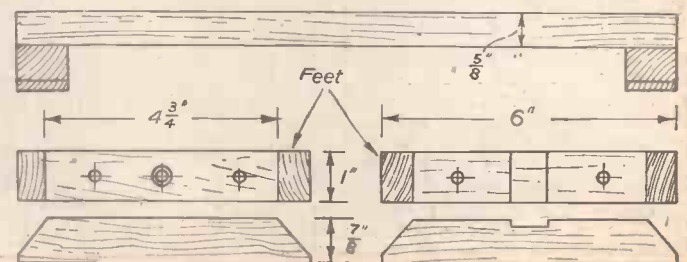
(right).—Plan and side view of lathe bed, and details of feet.
